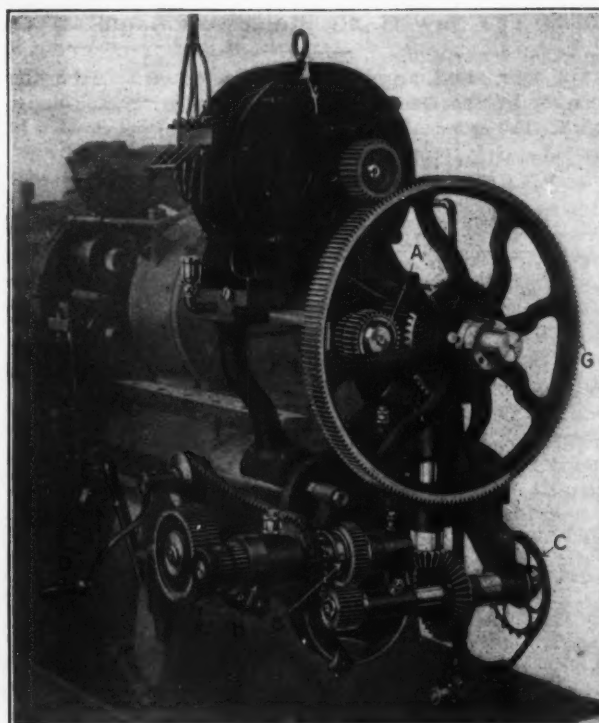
Detail of the Drive with Gear Covers Removed.
